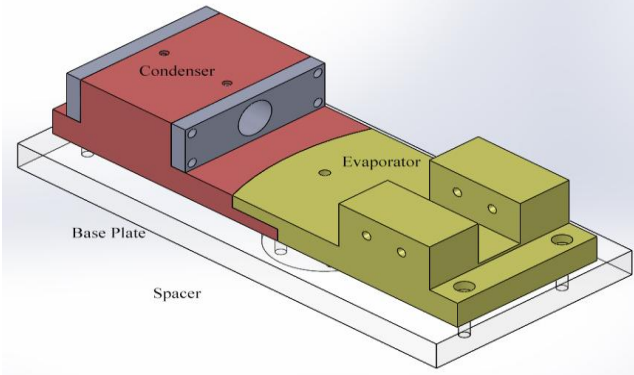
Experimental setup – framework for holding, bending and testing the heat pipe assembly.
